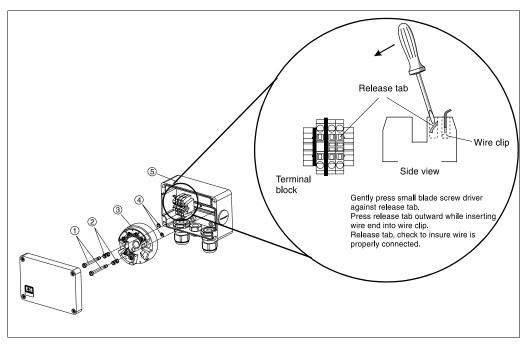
Mounting the temperature transmitter, depicted here with terminal housing
